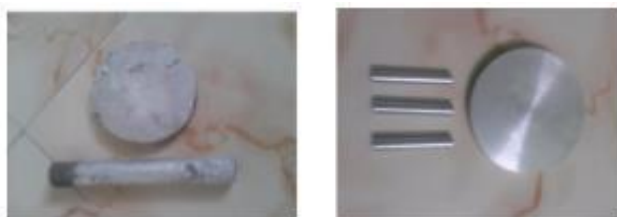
pin specimen & hardened steel disc (Before and after machining)
